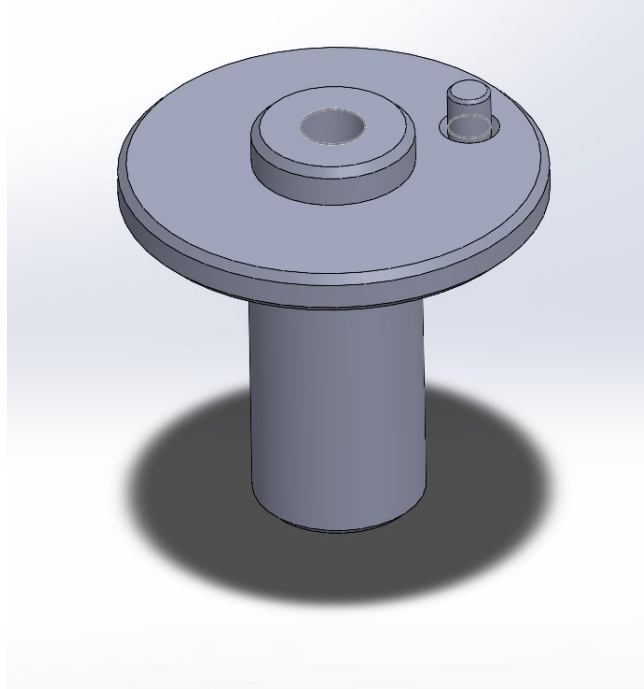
SolidWorks CAD Rendering of the Mill Fixture
